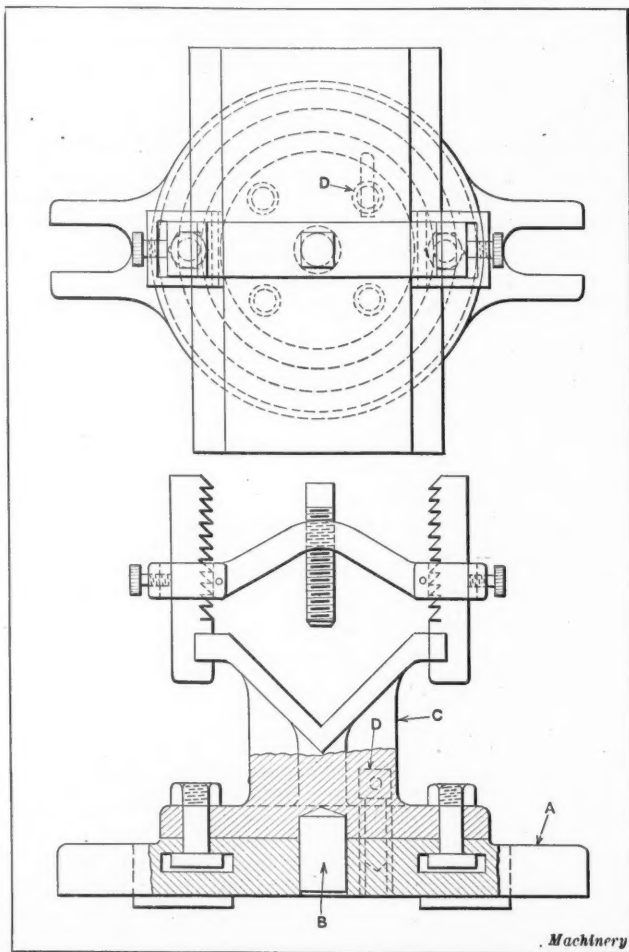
Centering Fixture for holding Crankshafts and Similar Parts when centering
